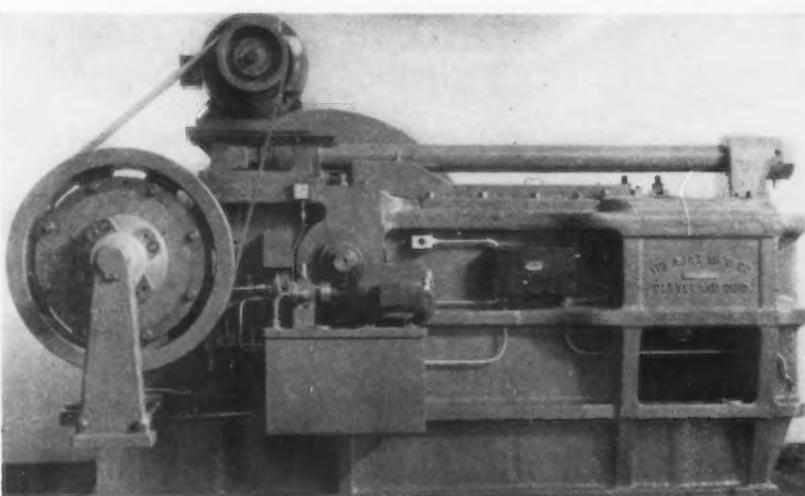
Hydraulic clutch mechanisms are provided on the larger sizes of Ajax forging machines.
